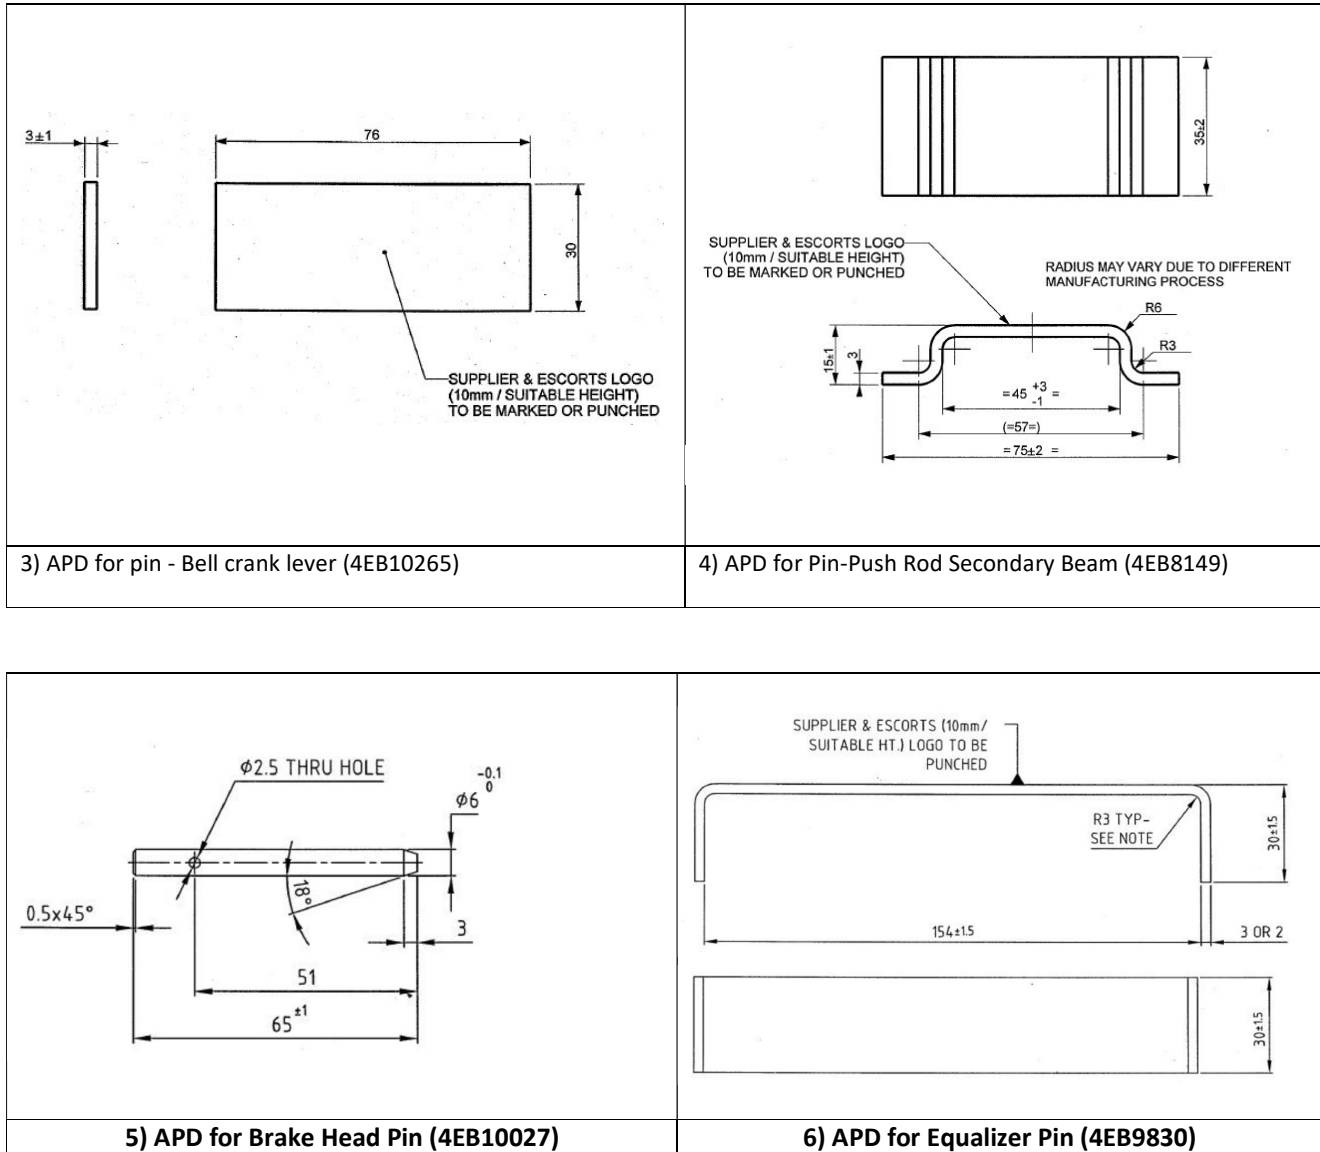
APD Locations (Brake Cylinder and Rigging Parts)
